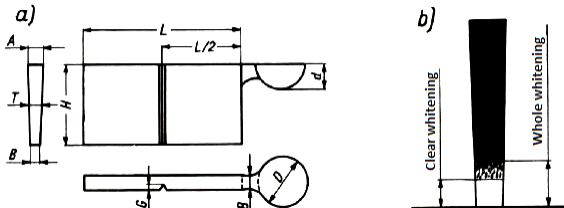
Casting of samples in the metal moulds - research on breakthroughs acc. to ASTM A367 [10]
